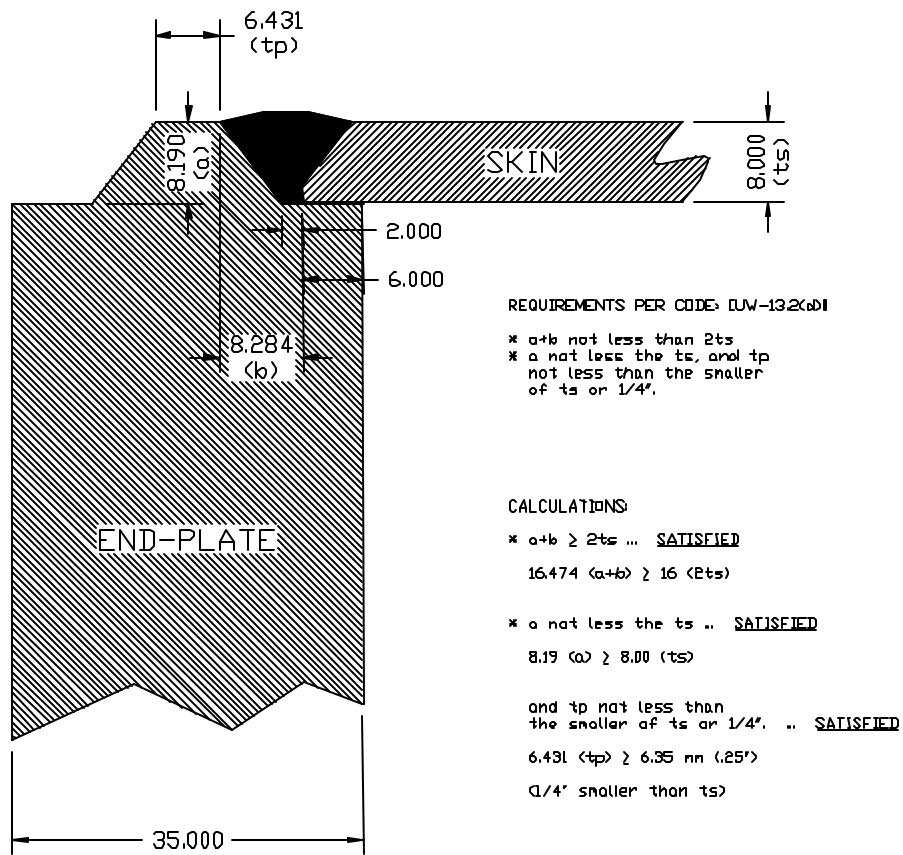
Detail of cold mass skin to end plate weld.
